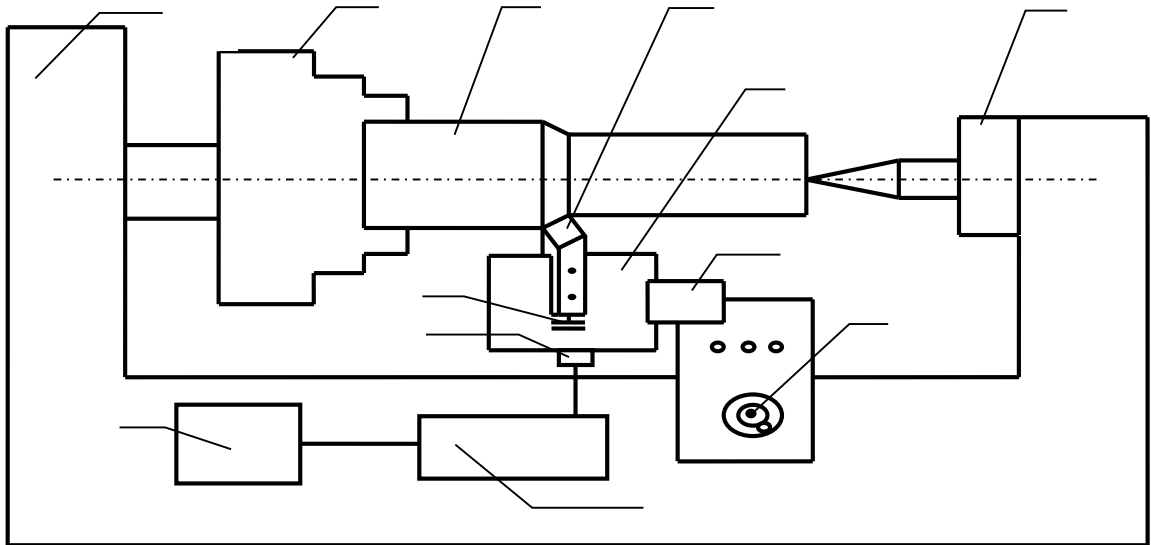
Schematic diagram of laboratory setup on the base of lathe JET BD-920W 321373M (Germany): 1-turning lathe JET BD-920W 321373M (Germany); 2-spindle; 3-sample of wood; 4-backhead of machine; 5-parameter; 6- dimensional platform; 7-tensometer sensor; 8-socket; 9 - gauge station ZET 017-T8; 10 - personal computer; 11 - slide; 12 - control knob
